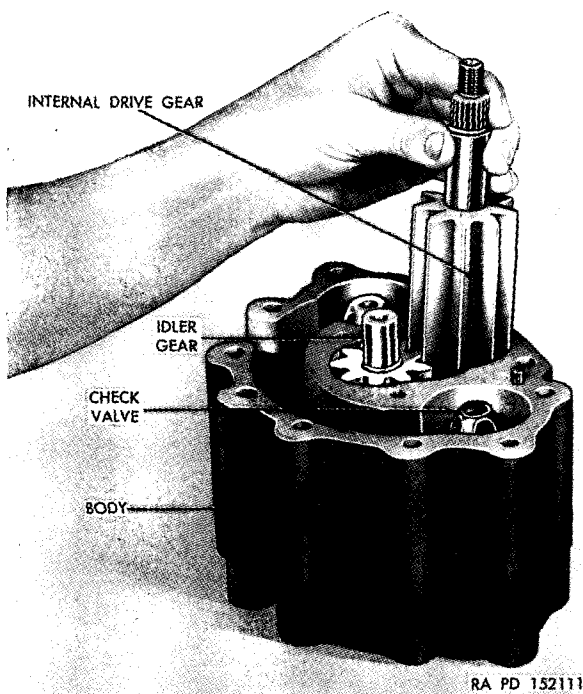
Removing or installing output-sump-pump-internal drive gear.
